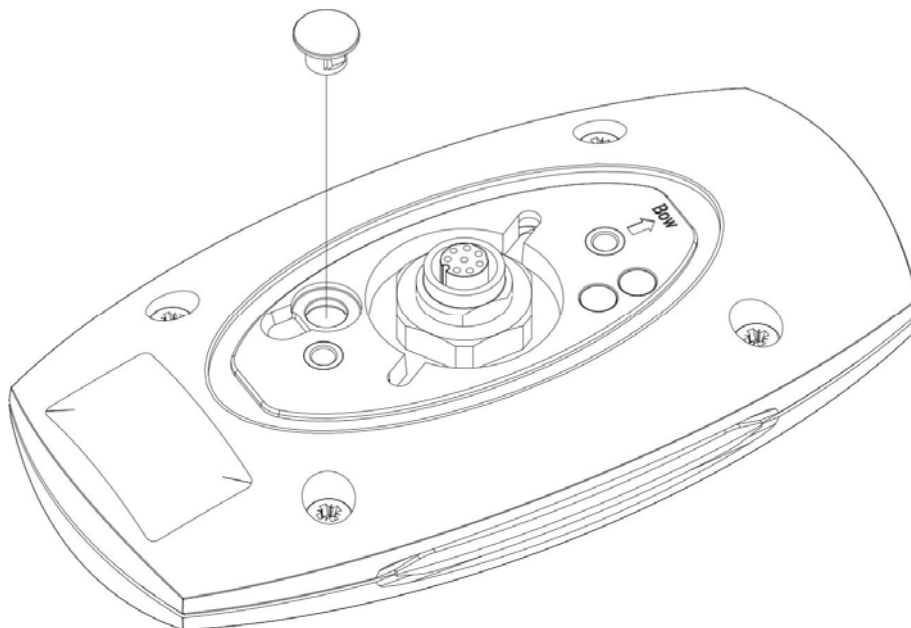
POLE MOUNT INSTALLATION STEP 2 (REMOVE CAP FOR DIP-SWITCH SETTINGS)
